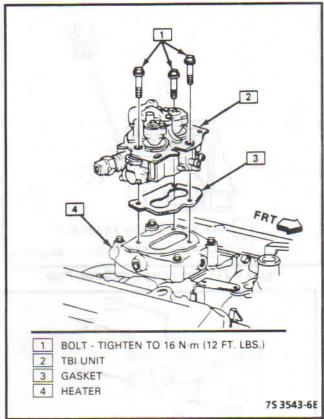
Replacing TBI 220 Unit - 7.4L Engine
